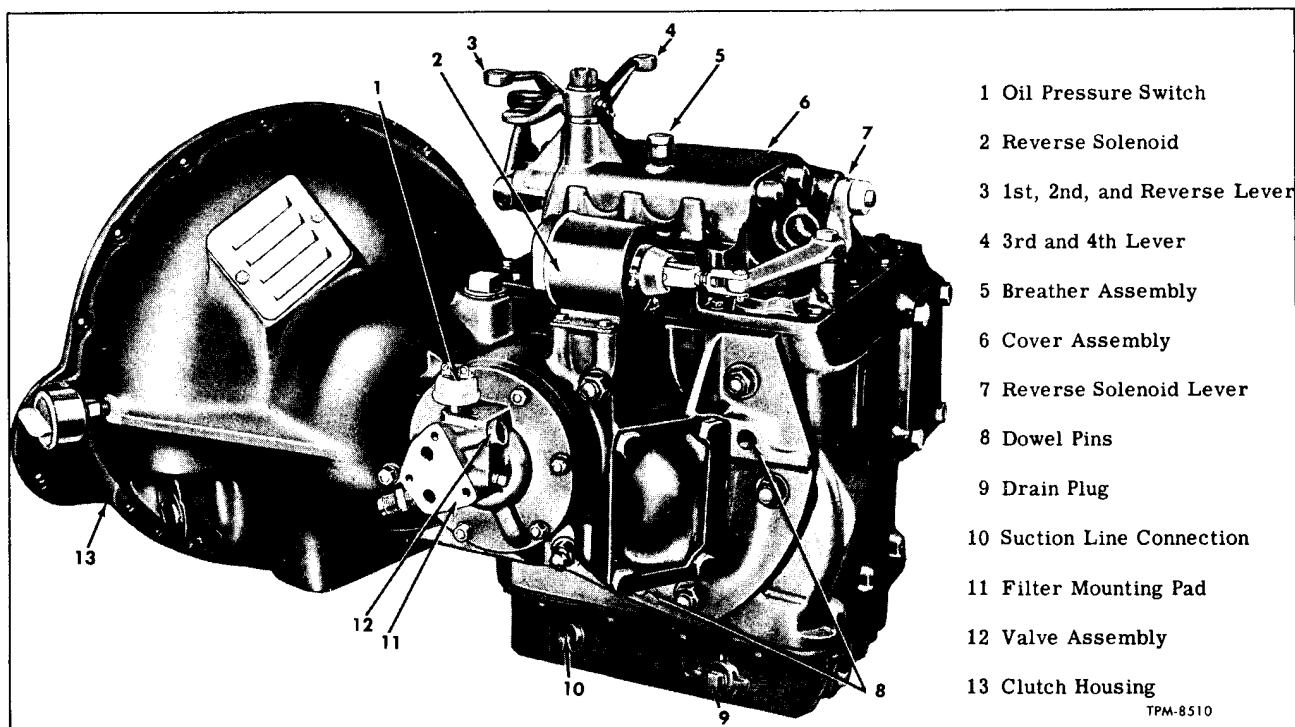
Transmission Assembly Showing Reverse Solenoid and Lever
